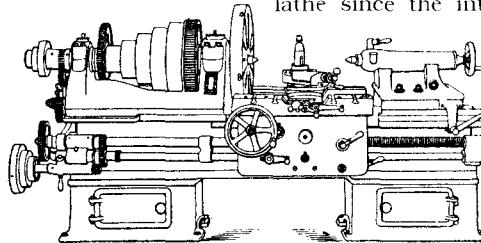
24-inch Swing Engine Lathe built by the R. K. Le Blond Machine Tool Company.
